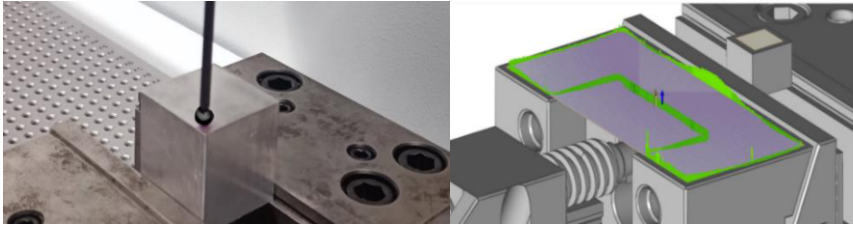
CMM measurement setup and scanning in CMM's built in Touch DMIS system
